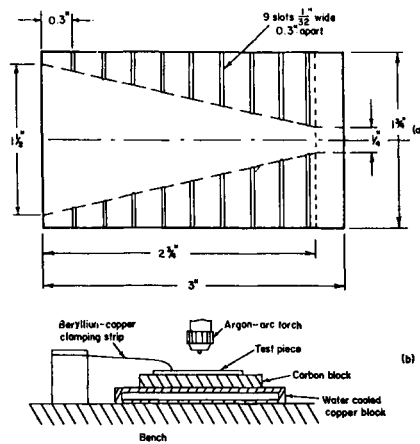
Houldcroft fishbone specimen: (a) for $\frac{1}{16}$ -in. thick material (increased by 50% for $\frac{1}{8}$ -in. sheet); (b) section through test assembly.
